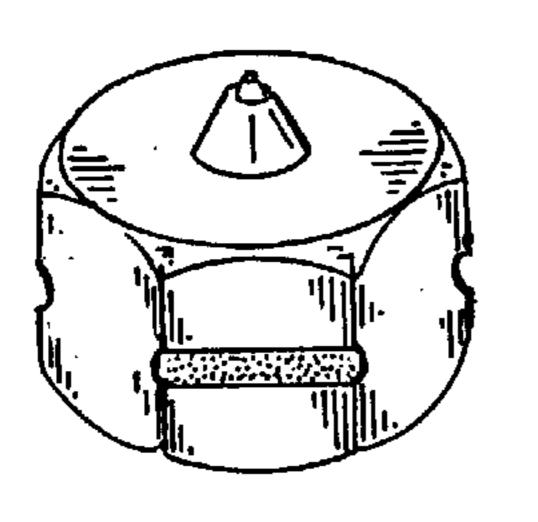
is a front elevational view of the nozzle of FIG. 16;
